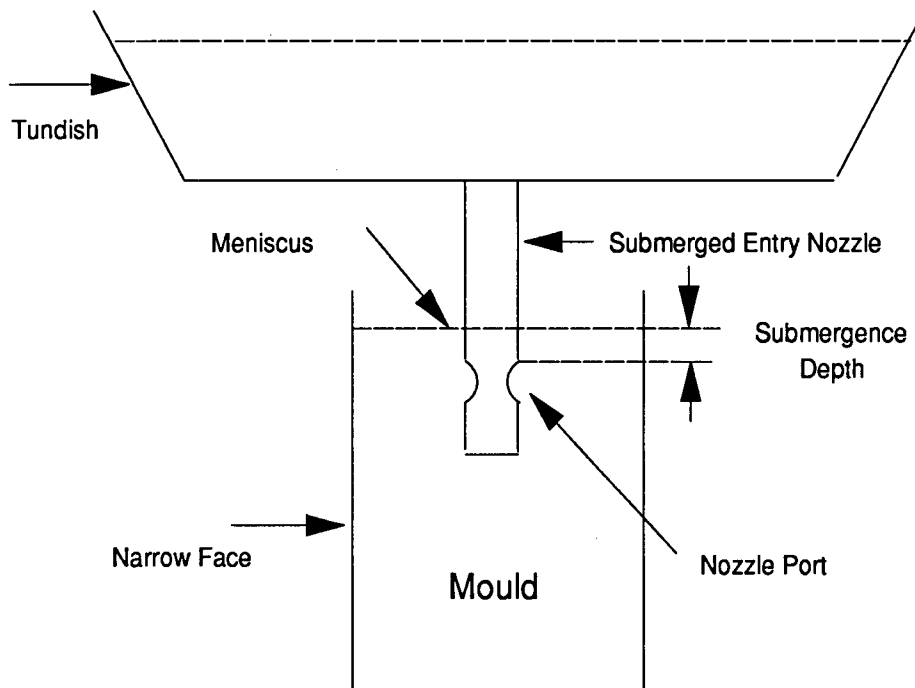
Schematic drawing showing the pouring of steel from the tundish into the mould through a submerged entry nozzle.
